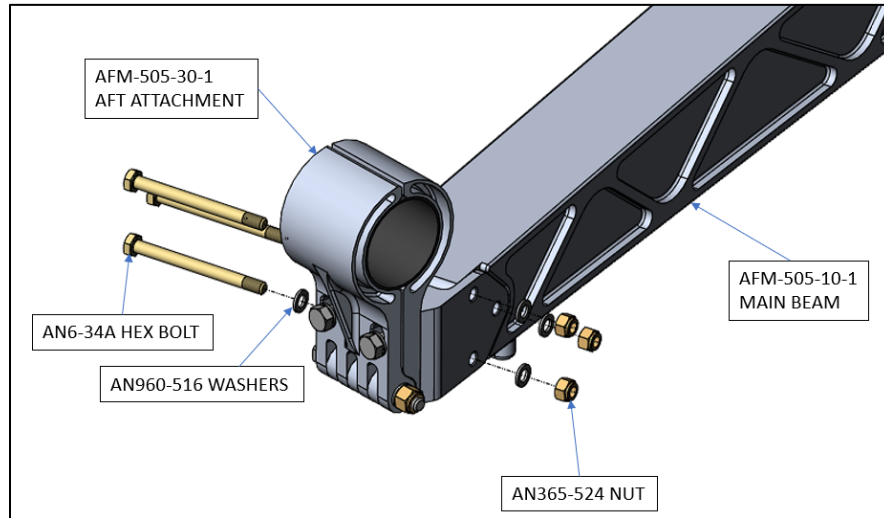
Assembly of the AFM-505-30-1 Aft Attachment Assembly onto the AFM-505-10-1 Main Beam
